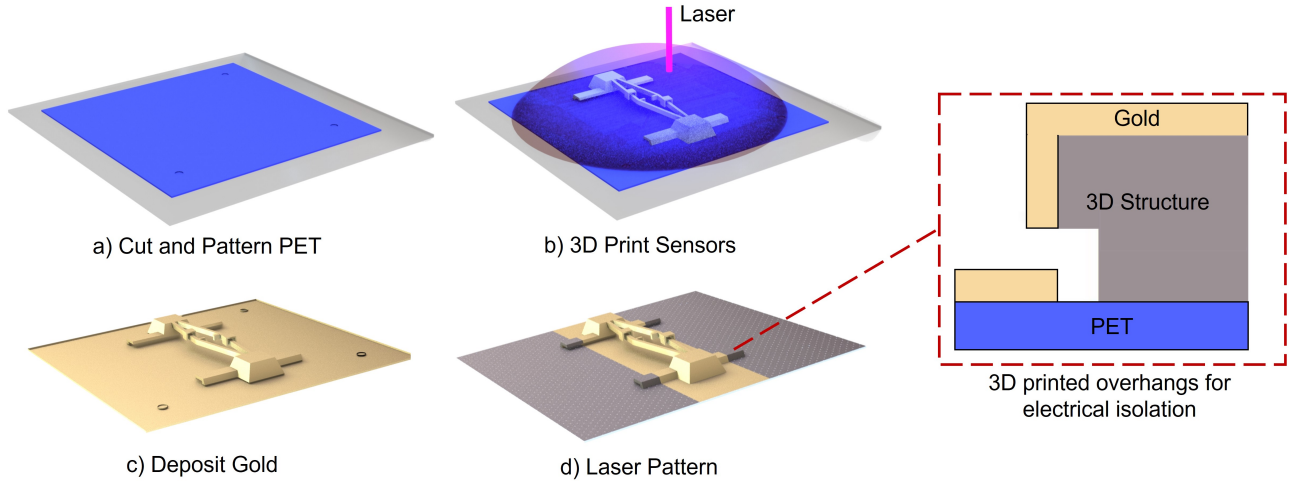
Sensor fabrication. a) The PET wing is laser cut and adhered to a glass wafer. b) The sensors are printed in IP-S photoresist directly on the PET using two-photon polymerization. c) Gold is sputtered to add electrical conductivity to the sensors and wing. d) The UV laser is used to pattern the gold providing electrical isolation between the sensors. The call-out illustration shows a cross-section of 3D printed overhangs that are used for electrical isolation during the deposition of gold.
